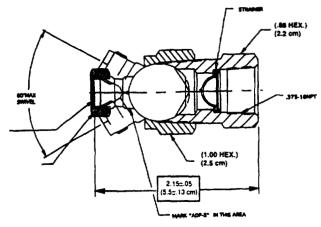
Section View of a ADP-S Swivel Nozzle
